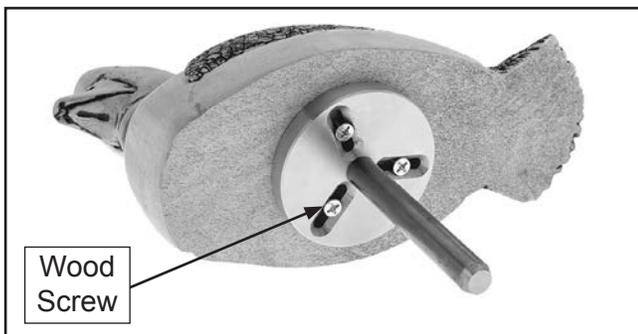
Example of workpiece attached to optional BE1210 faceplate.
